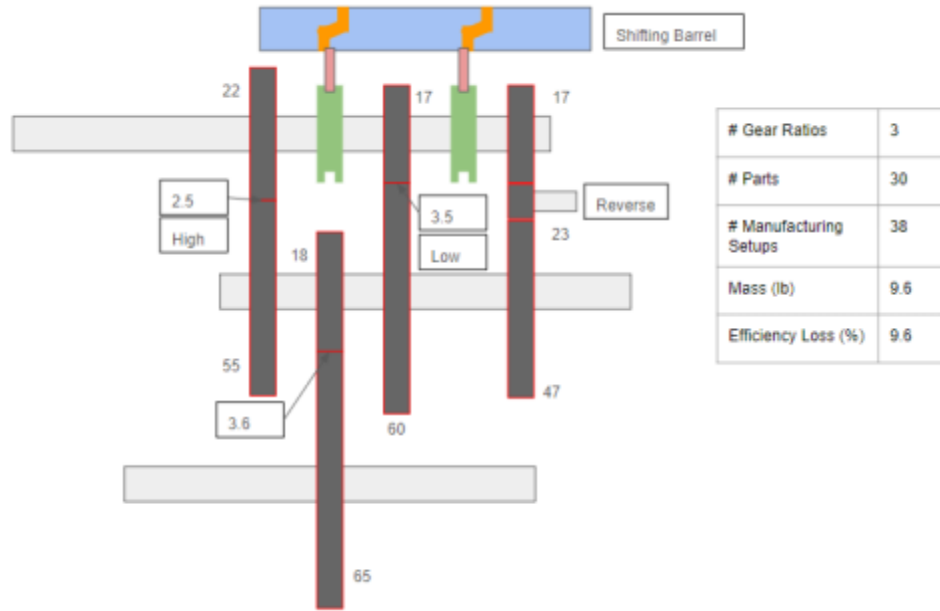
Selected Concept: 2024 Gearbox with Added Geartrain. Torque is input through the top shaft and output through the bottom-most shaft. Dog clutches select between high, low, and reverse gears through an actuated shifting barrel.
